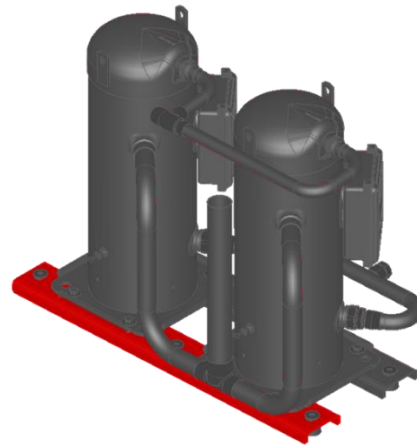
Tandem assembly for ZP232K* & ZP292K
